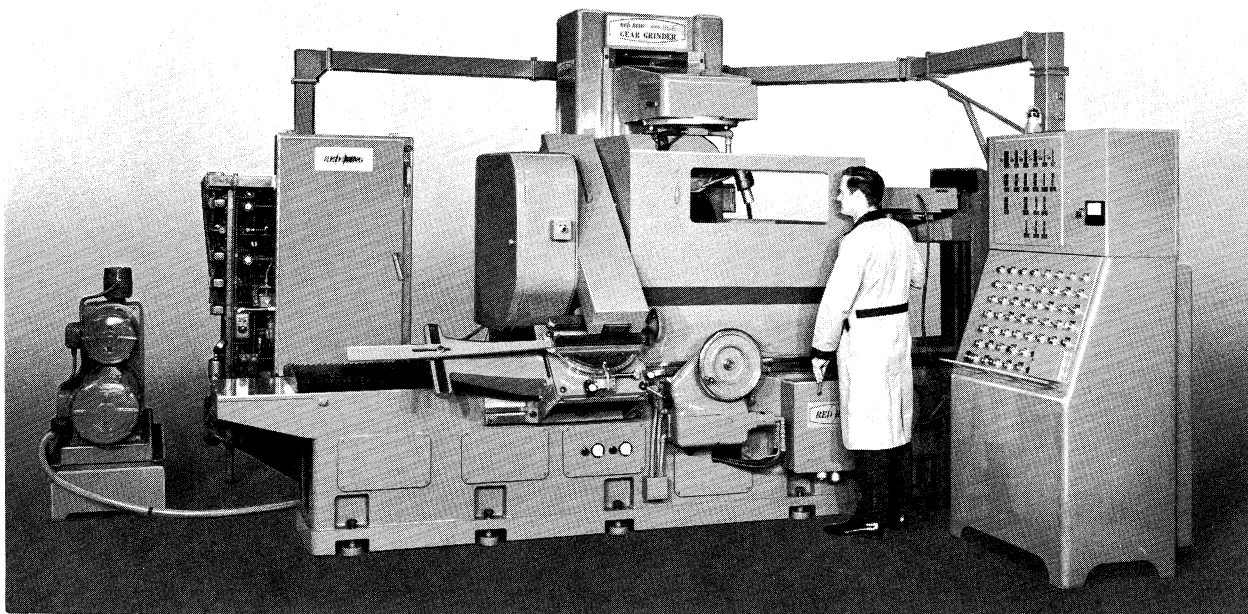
Model SGK-24 in. gear grinding center for external or internal helical gears.
